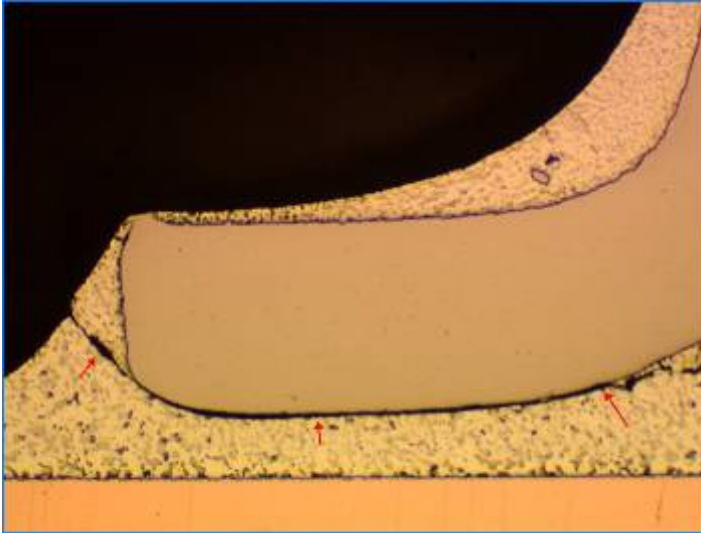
cross section, SN67, U62, left lead solder crack, 200xa
